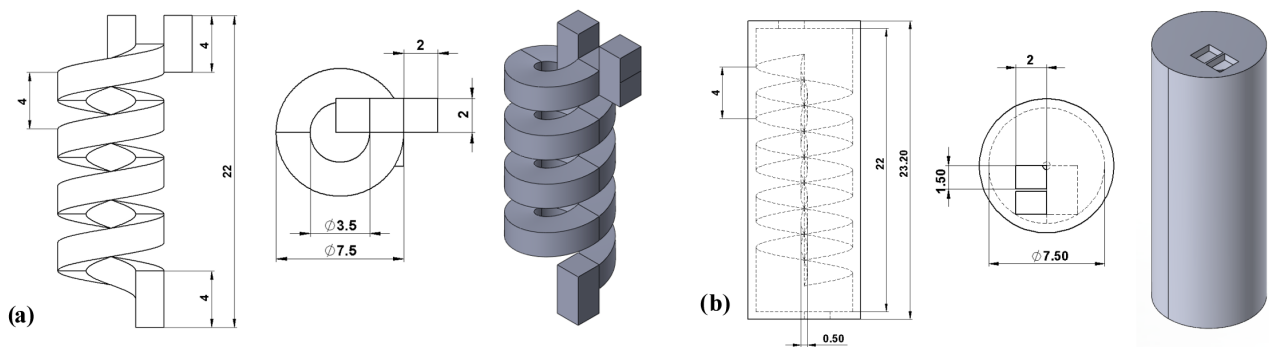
Geometry and dimensions in millimetres of the solutions proposed, front, top, and isometric views, respectively: (a) Internal helical mixer. (b) External helical mixer.
